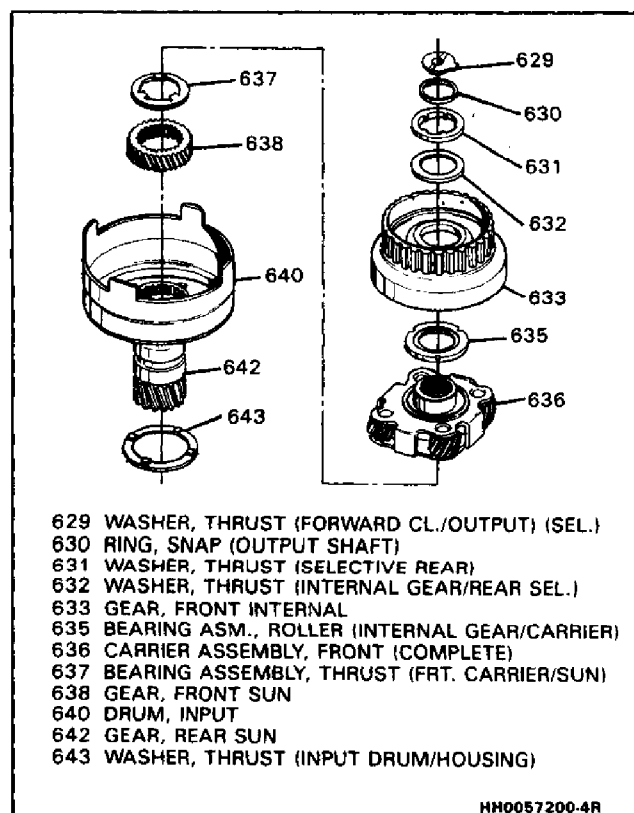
Removing Front Internal Gear, Carrier and Input Drum
